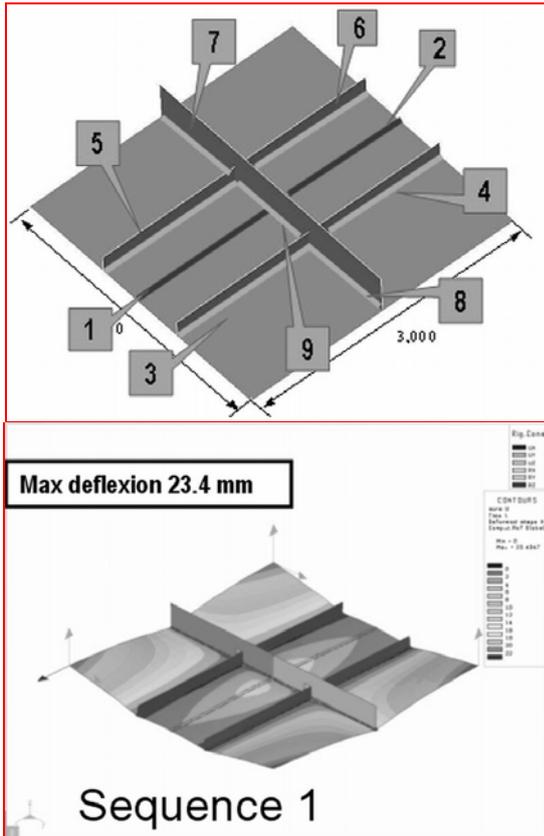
Welding sequence No. 1 (extrusion method)
